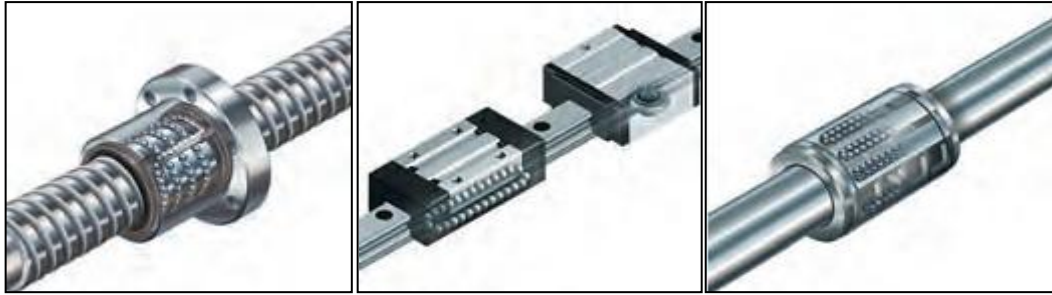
Ball Screw, Linear Guide, Linear Shaft and Bushing. Source: (Bosch Rexroth, 2011)
